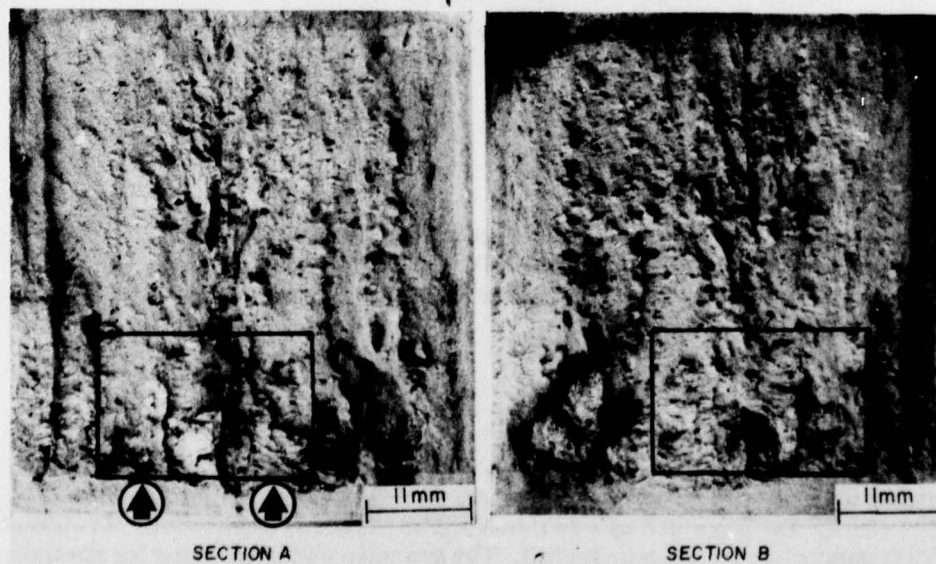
Mating halves of HY-130 weldment fractured during stress corrosion testing. Outlined areas indicate portions of specimen analyzed. The arrows indicate edge along which fractographic studies were carried out on section A.
